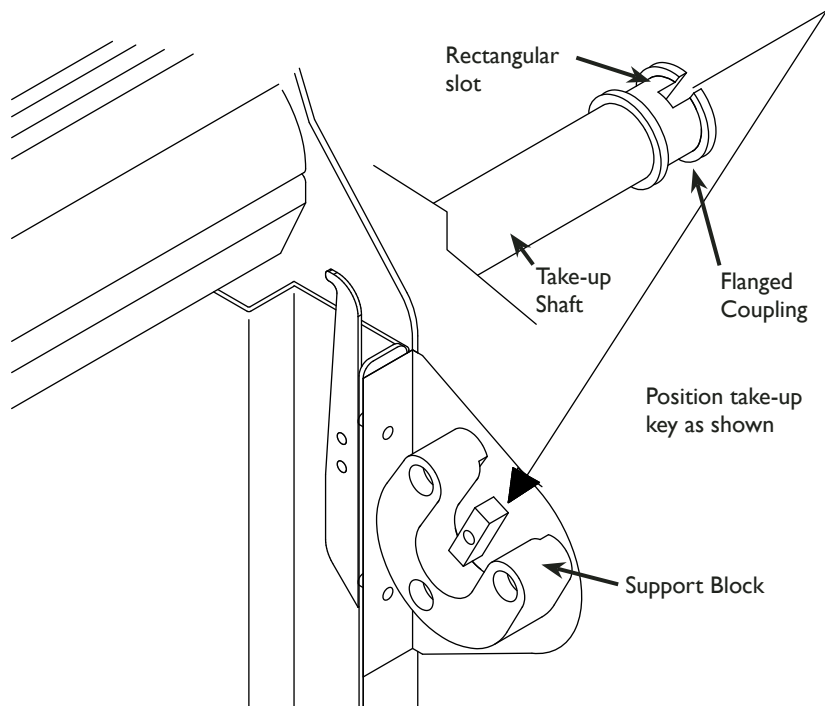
The slot in the flanged coupling on the take-up shaft fits into the key in the right front support block
